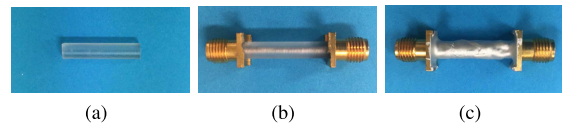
Fabrication steps of additively manufactured coaxial line. (a) 3-D-printed dielectric, (b) prototype before colloidal silver deposition, and (c) complete prototype.
